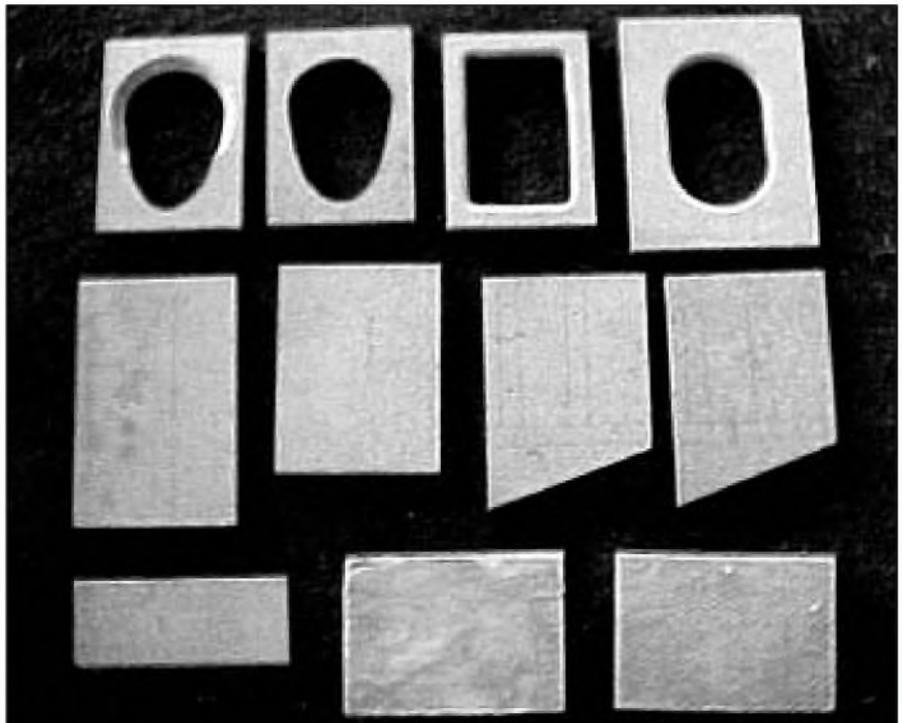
Array of pieces to build boxes #1 and #2—see text for layout.
